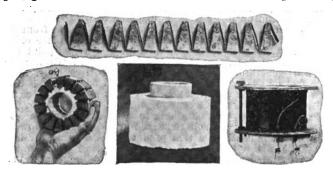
MOULD FOR CASTING COX THERMO-ELEMENTS.
